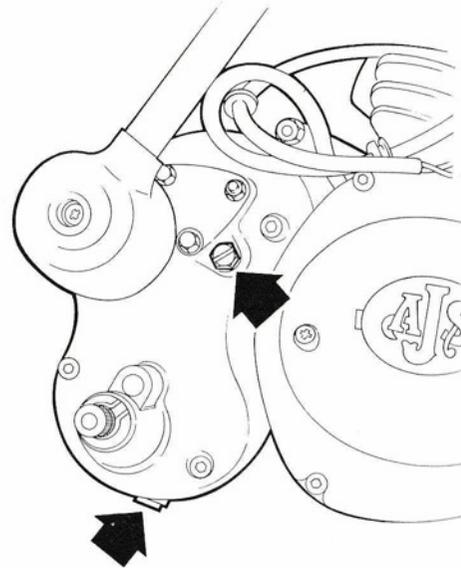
Gearbox (Transmission) plugs—oil filler/level plug top and drain plug bottom.
